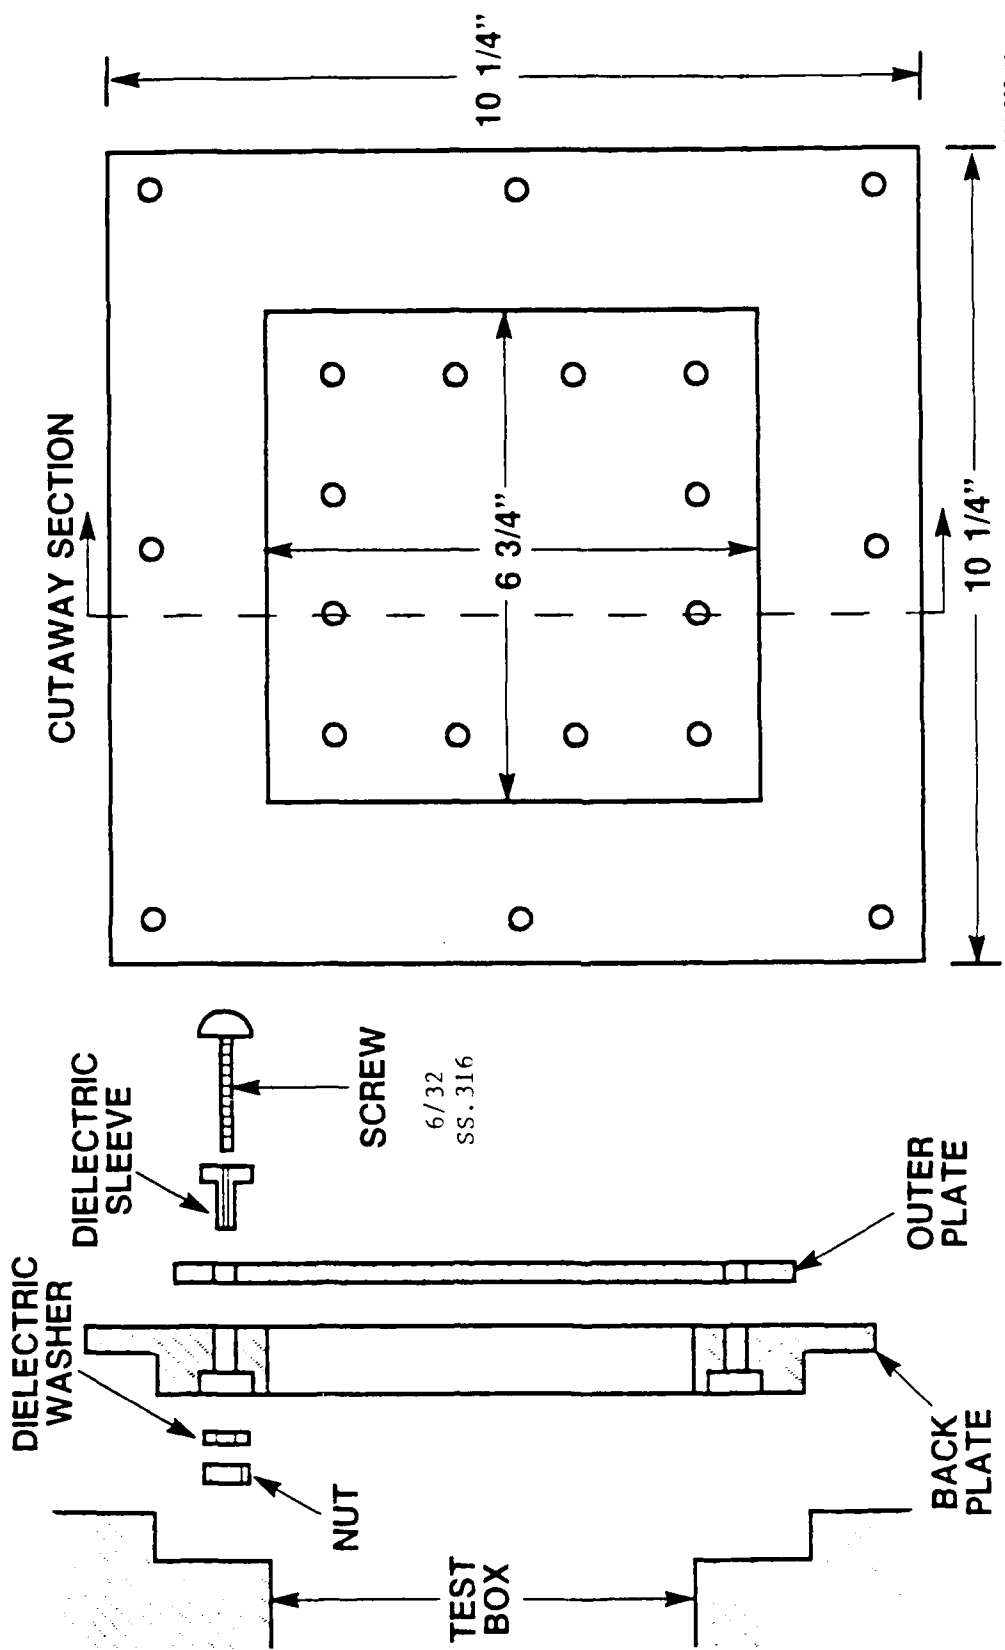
SKETCH OF STAINLESS STEEL TEST JOINT
